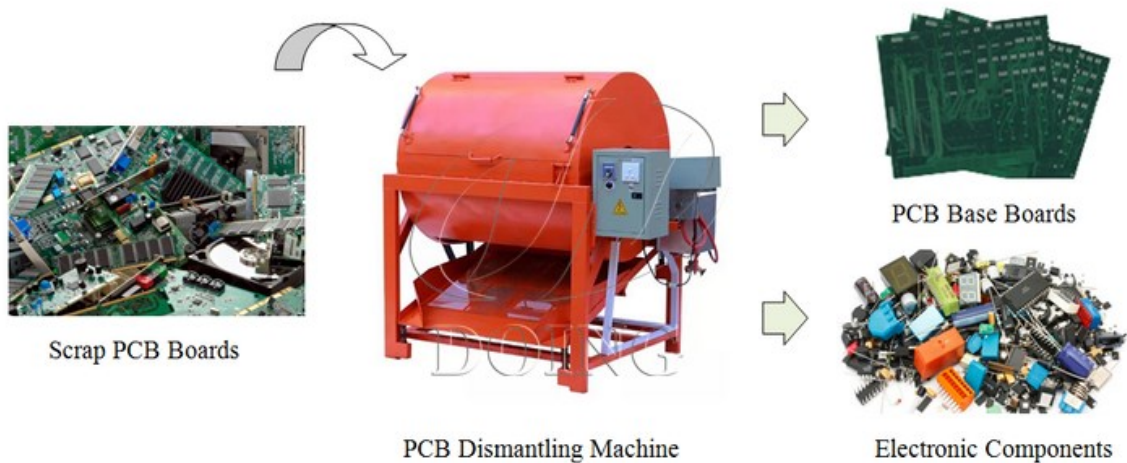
PCB dismantling machine from Doing Co Ltd manufactory.
